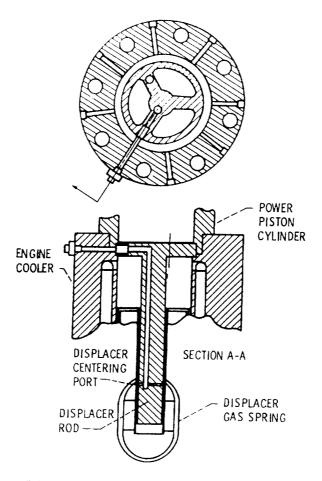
DISPLACER ROD MOUNTING AND COMMUNICATION PORTS FOR RE-1000 ENGINE.
